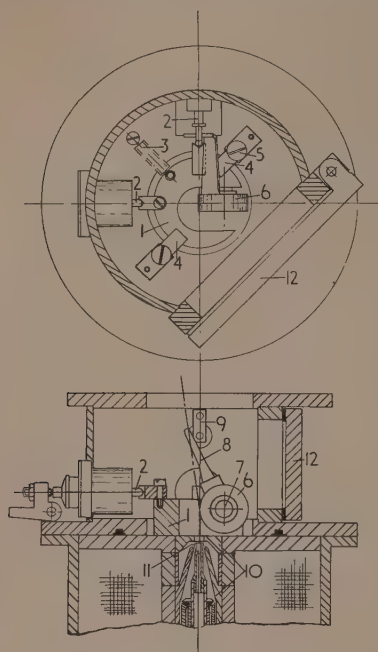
(a). Mechanical stage for ring specimen (observation perpendicular to ring axis)
